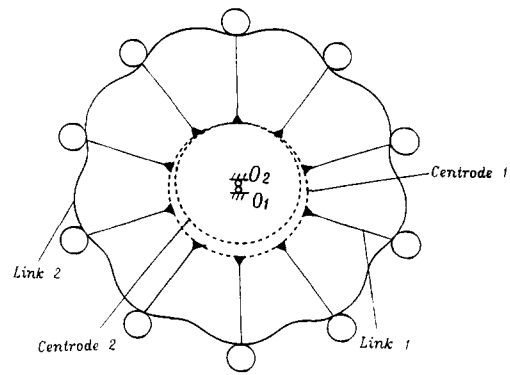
Planar cycloidal gearing with pin teeth and internal tangency.
